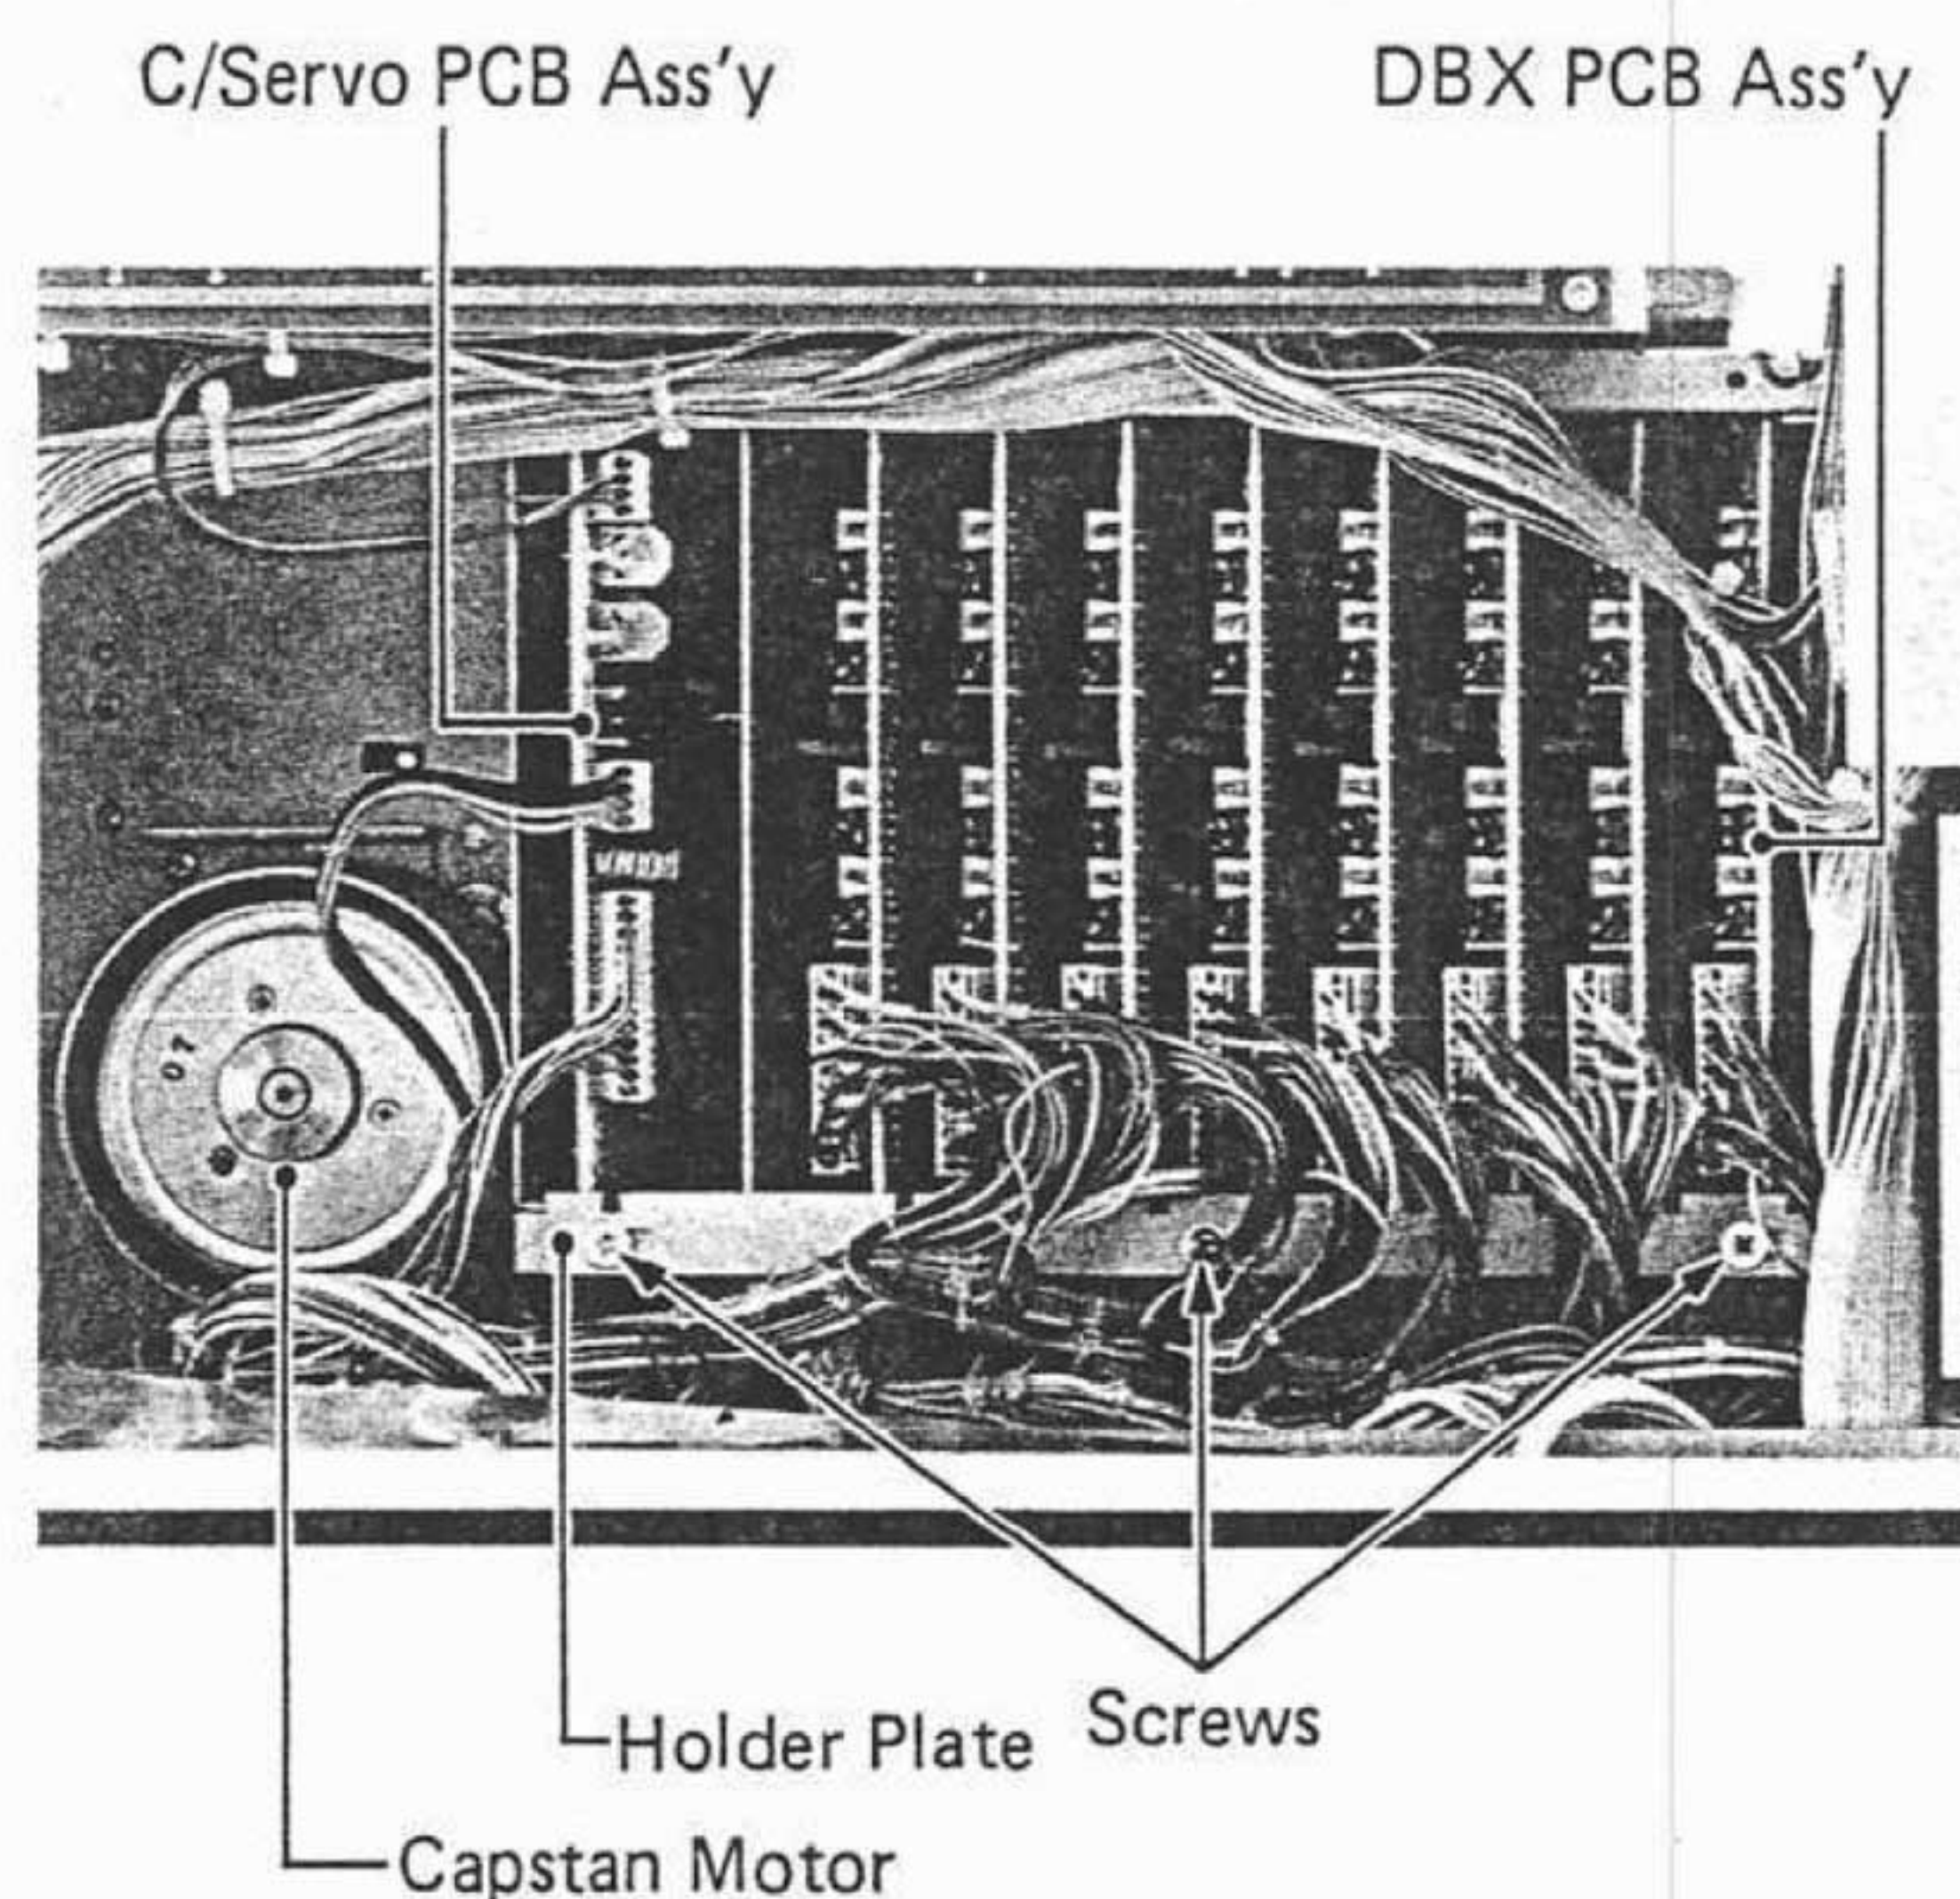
REMOVAL OF DBX & CAPSTAN SERVO PCB CARDS
